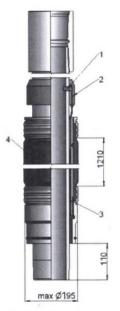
Module of upper and lower filling packer [8] Rys. 2. Moduł górnego i dolnego pakera [8]
